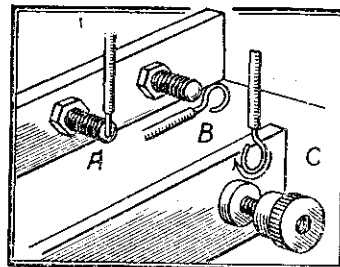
Instead of soldering the straight end of a wire to a terminal stem, it is much better to bend the end of the wire into a loop and then solder it.
